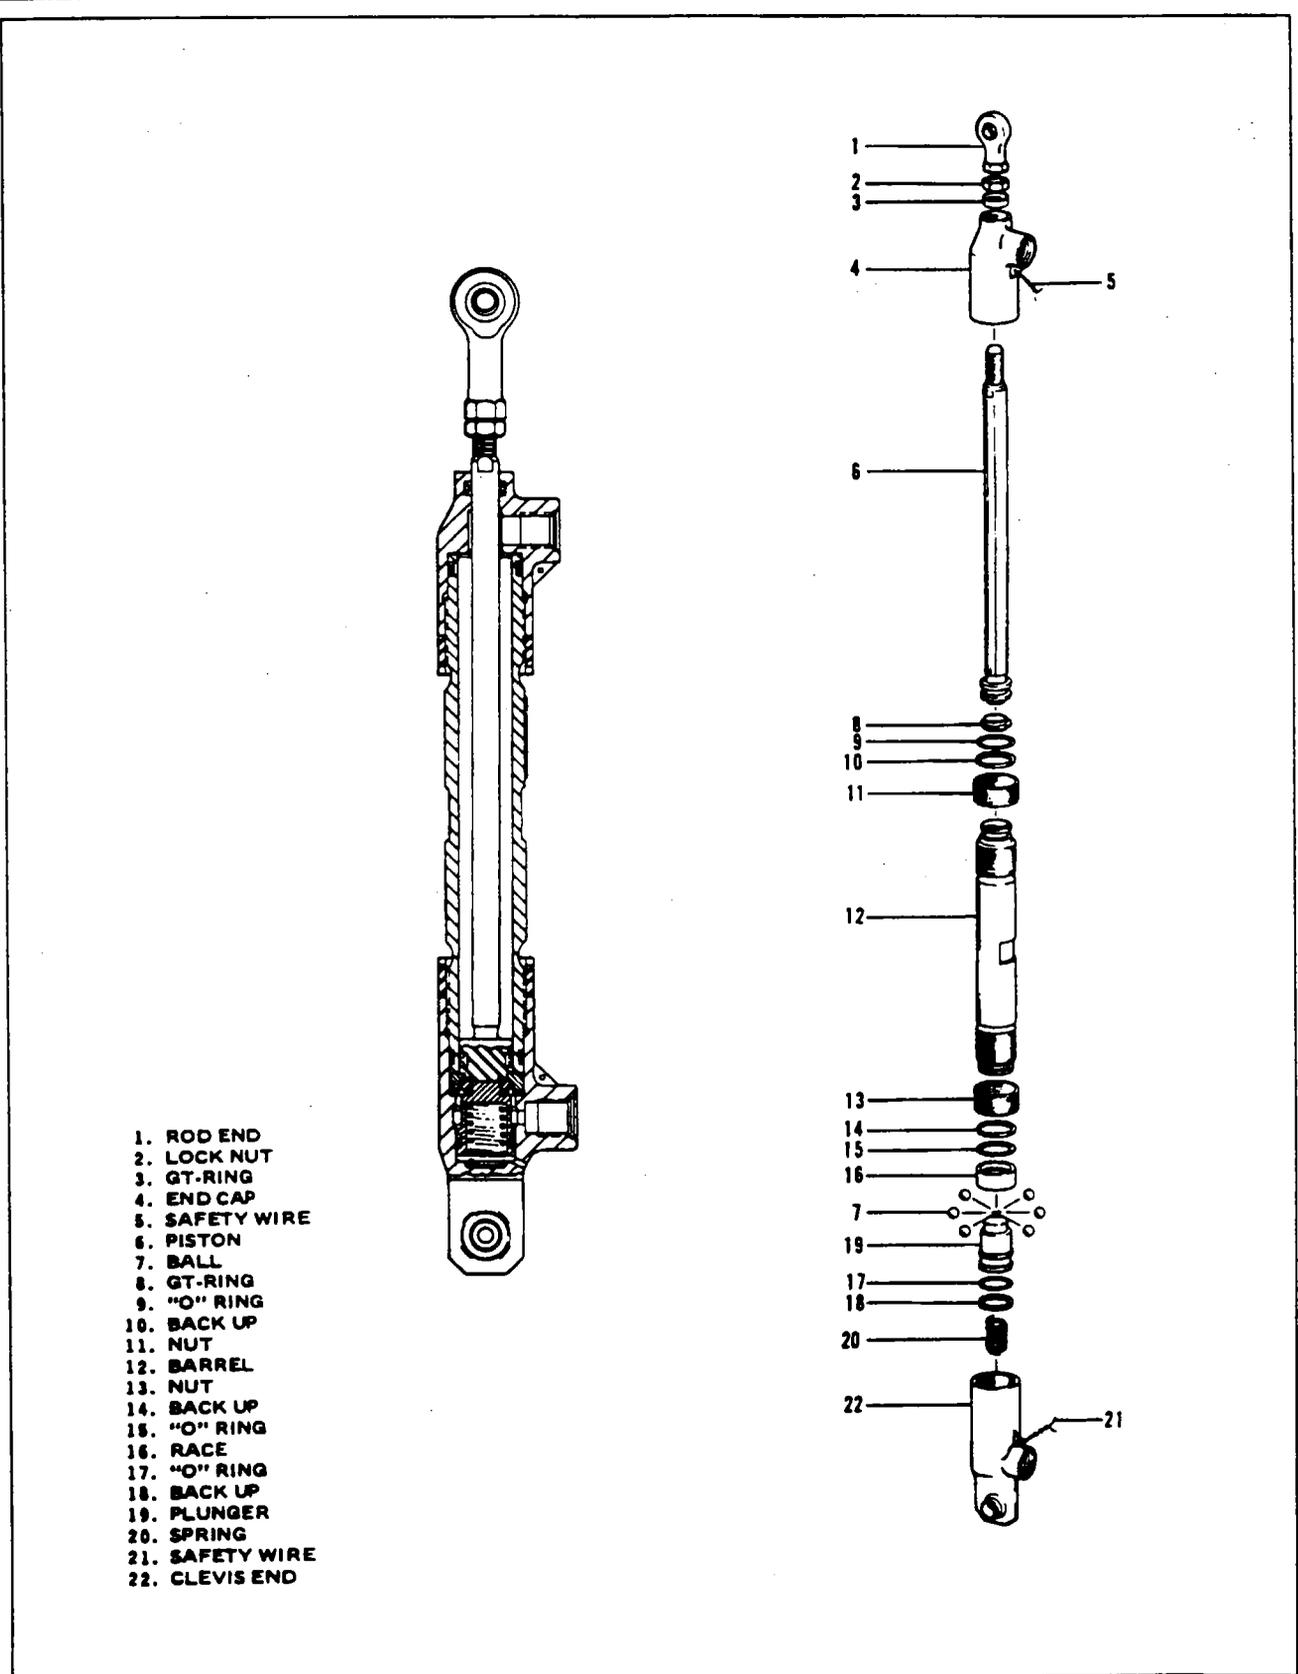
Gear Door Actuating Cylinder (Wiebel Tool)
